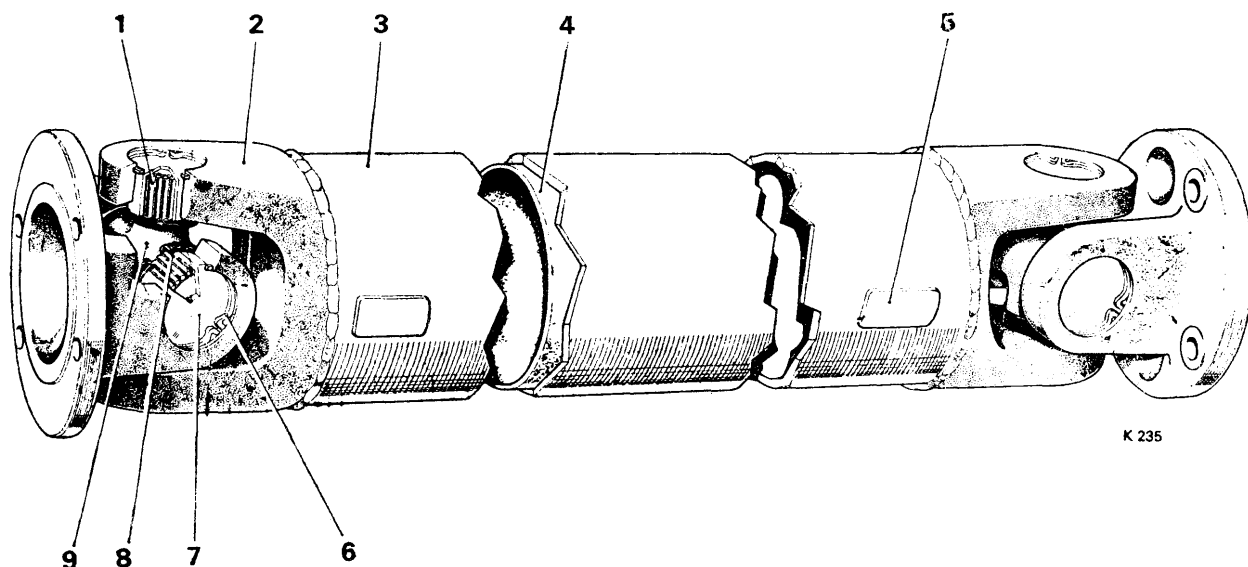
PROPELLER SHAFT—TORQUE CONVERTER TRANSMISSION
